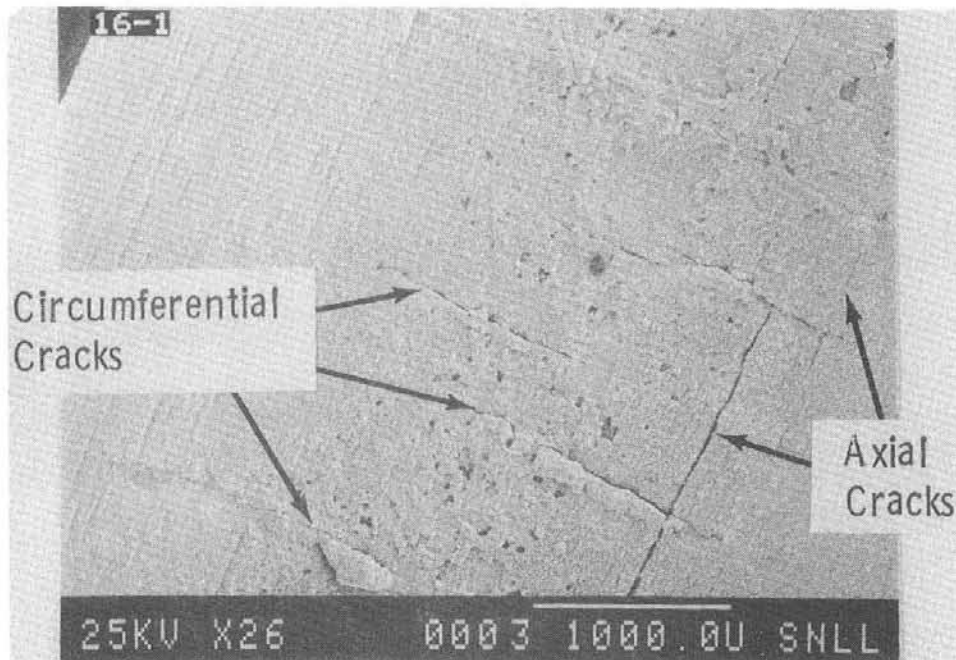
A low magnification photograph of the tube inside surface on the tube extrados, near the crack initiation site, from the tube shown in Figure 32. This surface has many circumferential and axial cracks.
